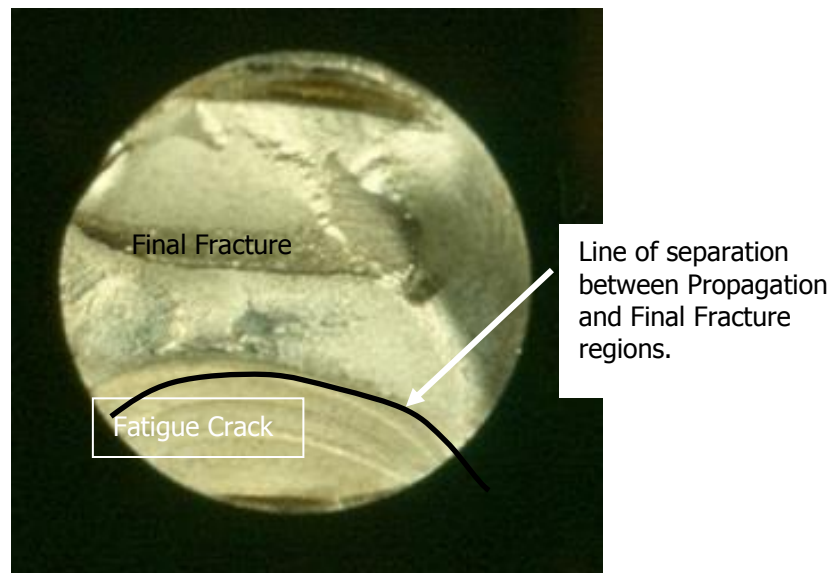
Fatigue fracture surface associated with the fatigue fracture of  $\frac{1}{2}$  inch diameter retaining pin under unidirectional bending at a high nominal stress. Note the crack initiation accounts for a negligible part of the fracture surface.
